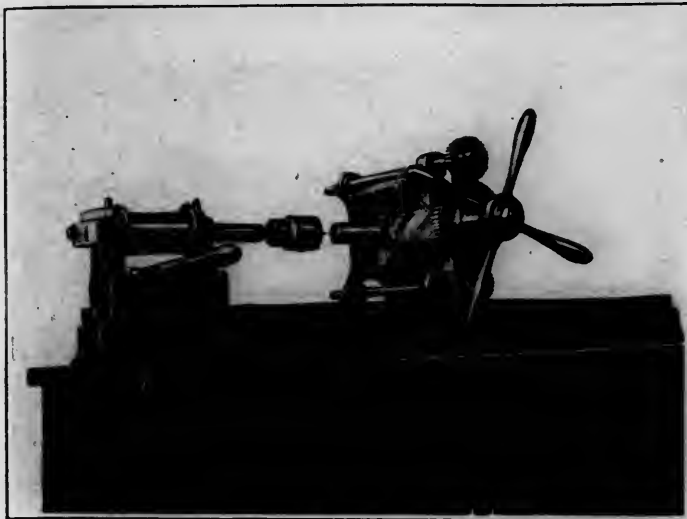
CENTERING MACHINE DESIGNED AND BUILT IN CENTRAL TOOL ROOM. THE COST OF THE MACHINE IS LOW; IT IS RAPID AND ACCURATE IN OPERATION.
